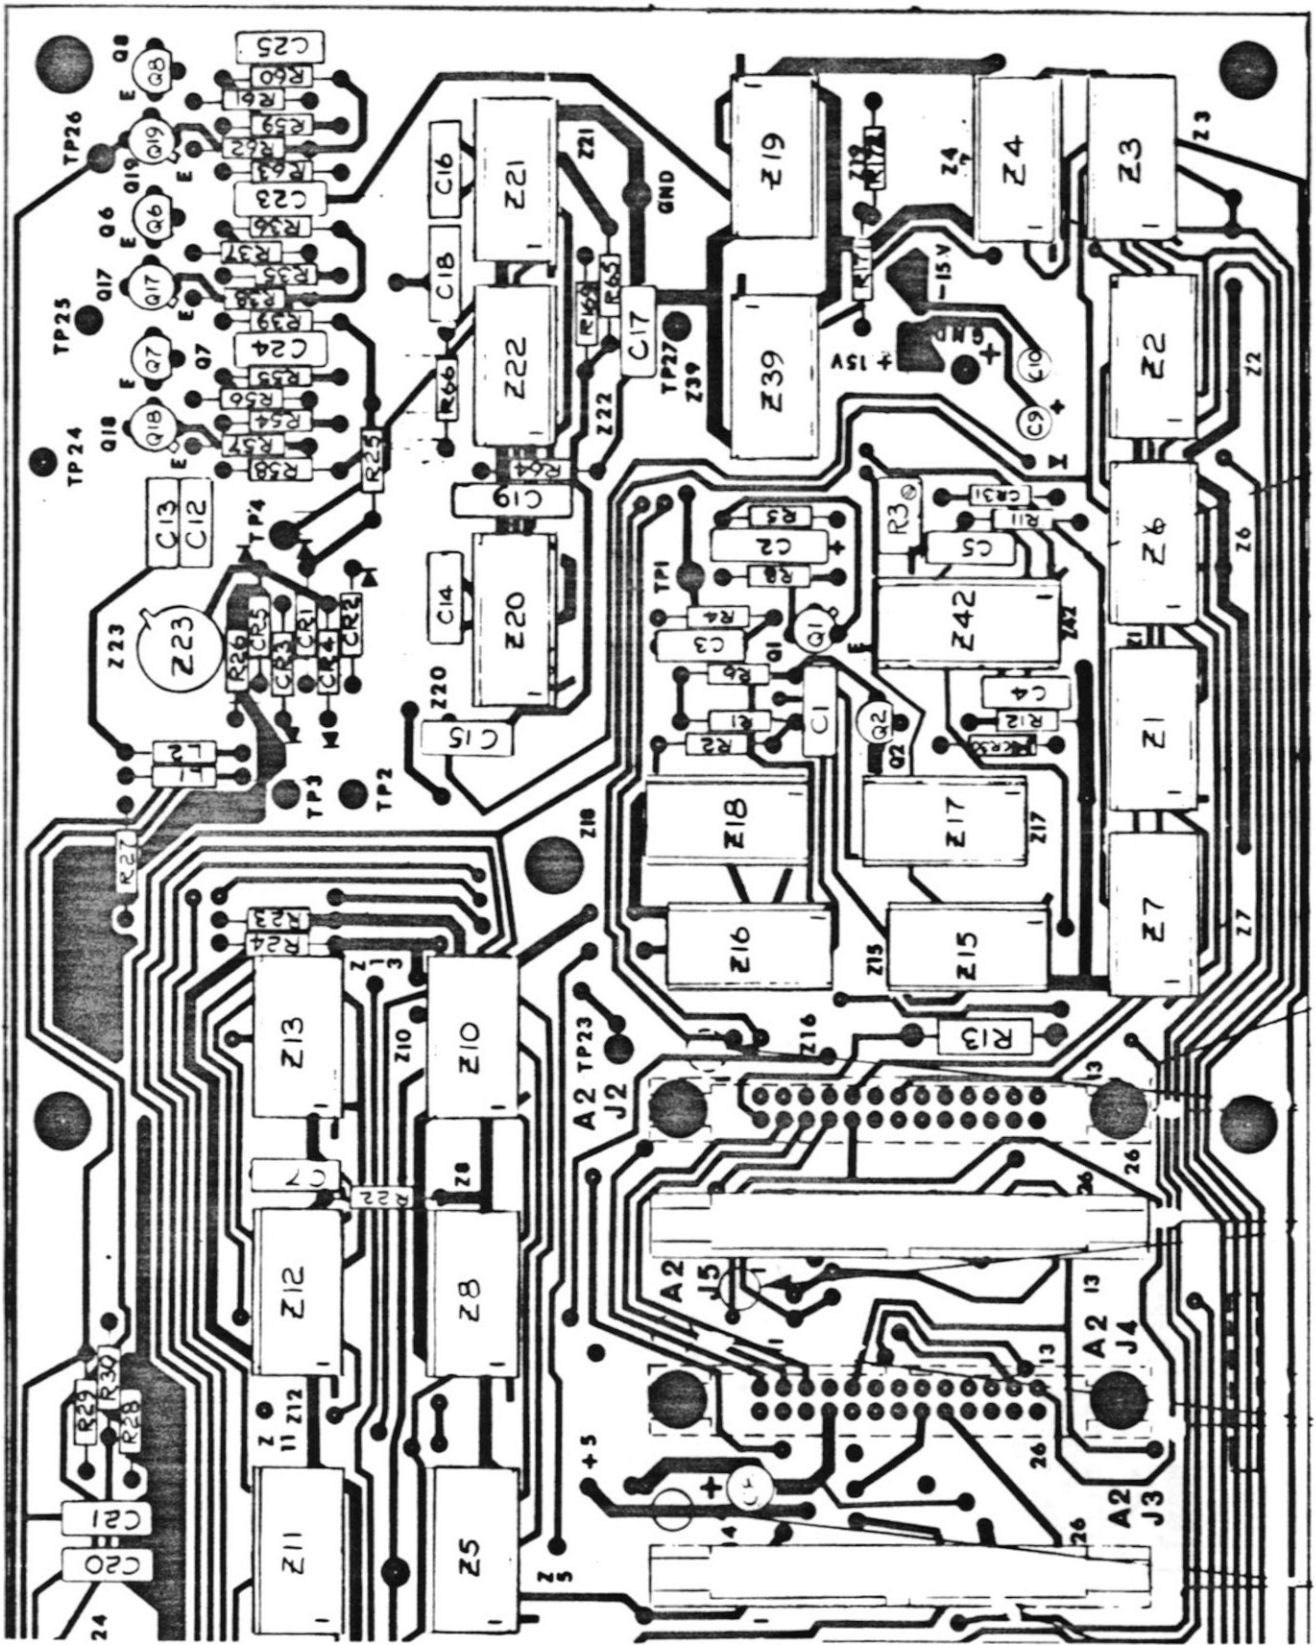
A/D Converter, Parts Locator (Sheet 2 of 2)
